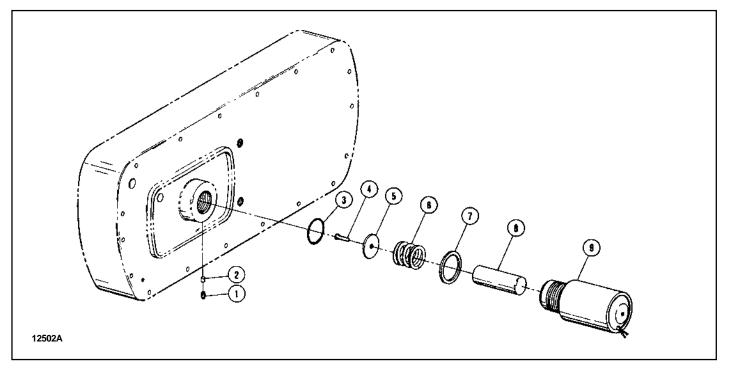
Motor Brake Actuating Mechanism - Hoist Gear Case
